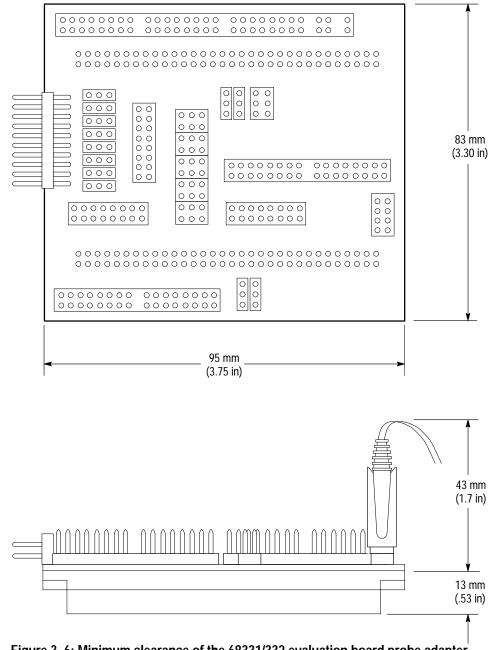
Minimum clearance of the 68331/332 evaluation board probe adapter
